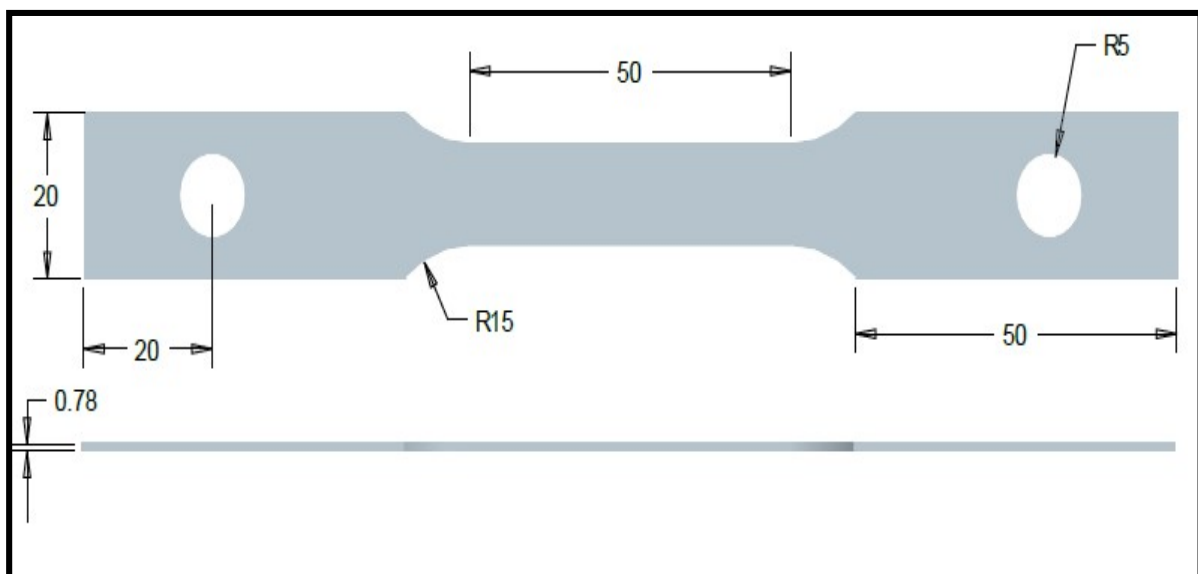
Schematic of the tensile testing specimen showing its various dimensions.
